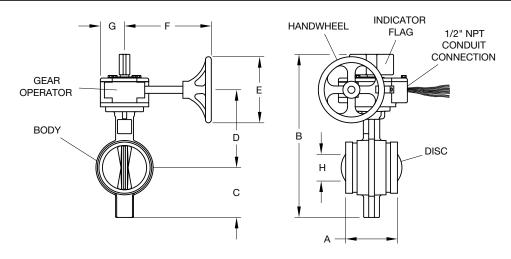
MODEL BFV-N GROOVED END BUTTERFLY VALVE - NOMINAL DIMENSIONS -
